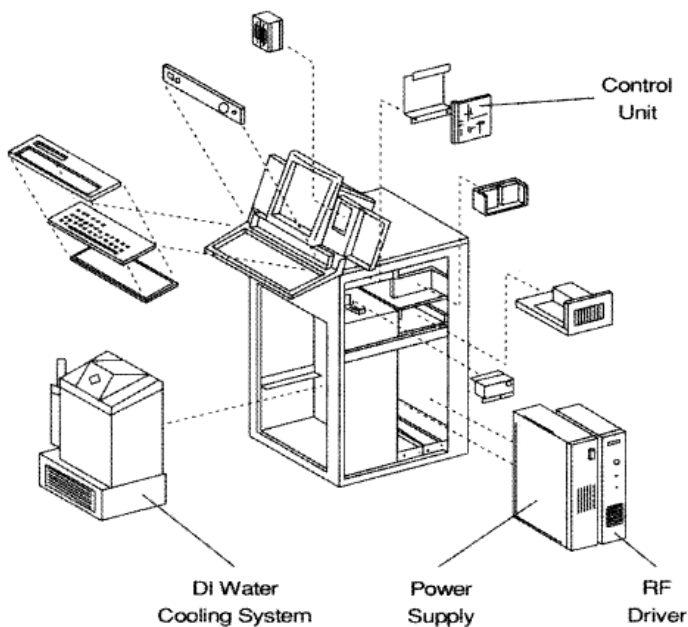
Exploded view of InstalMark Signature Cabinet.
